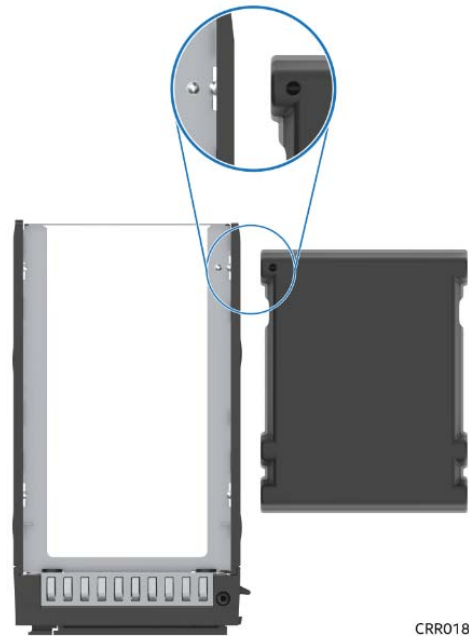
2.5" Drive Carrier Assembly – Drive Carrier and Drive Blank Alignment Features
